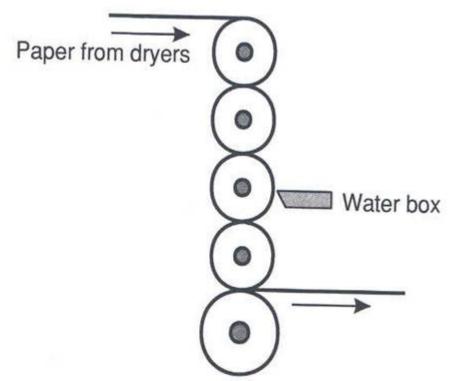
Calendering consists of passing the formed dried paper between sets of heavy rolls.
